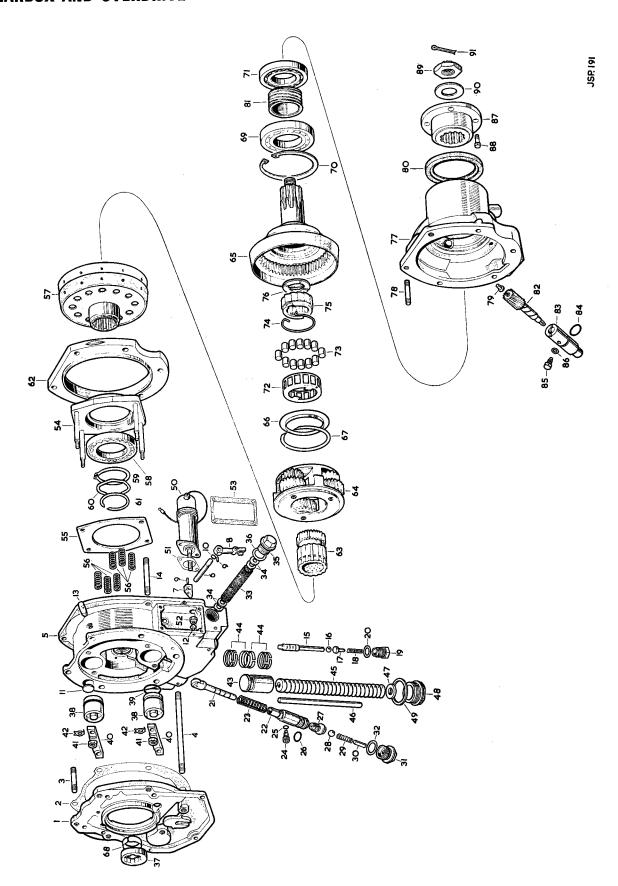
Exploded view of overdrive front and rear casing assemblies
